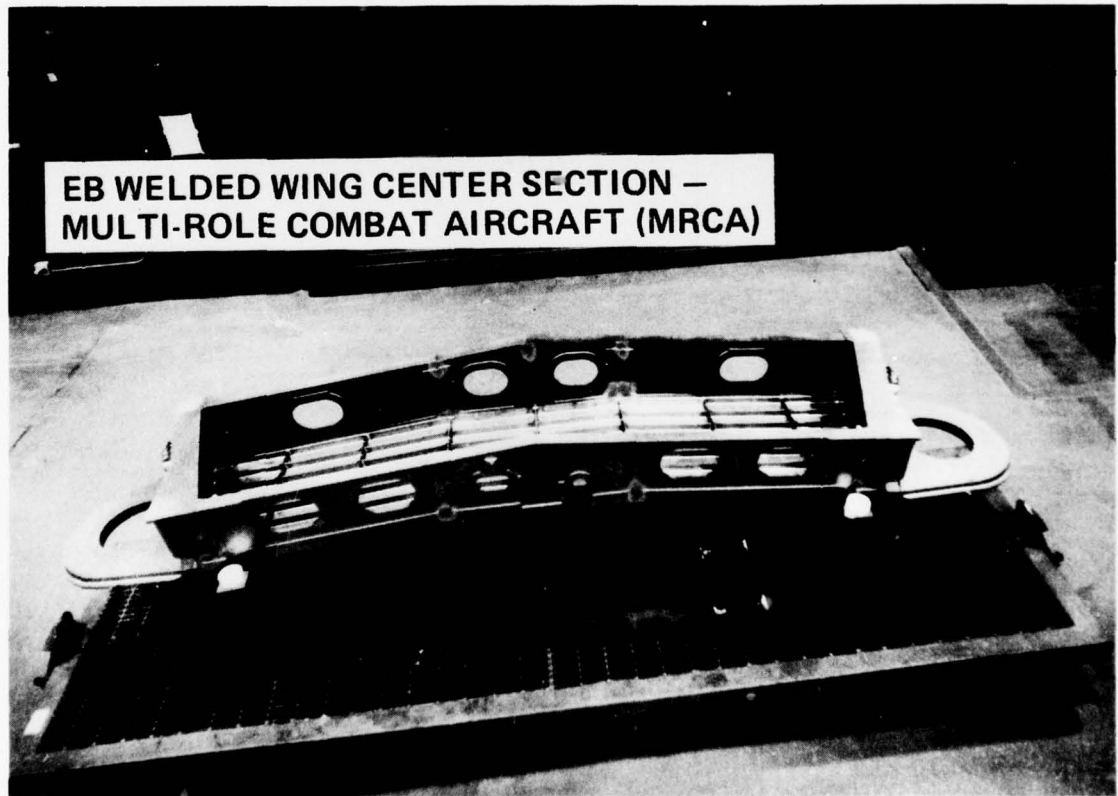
EB Welded Wing Center Section - Multi-Role Combat Aircraft (MRCA)
